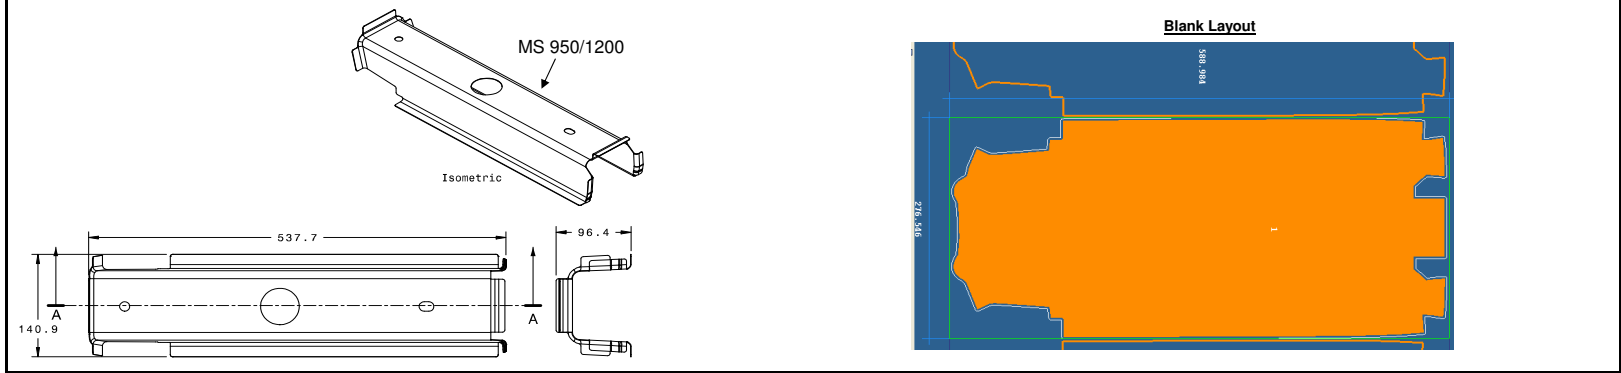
Tunnel Rail Bulkhead (50.1.0321)
